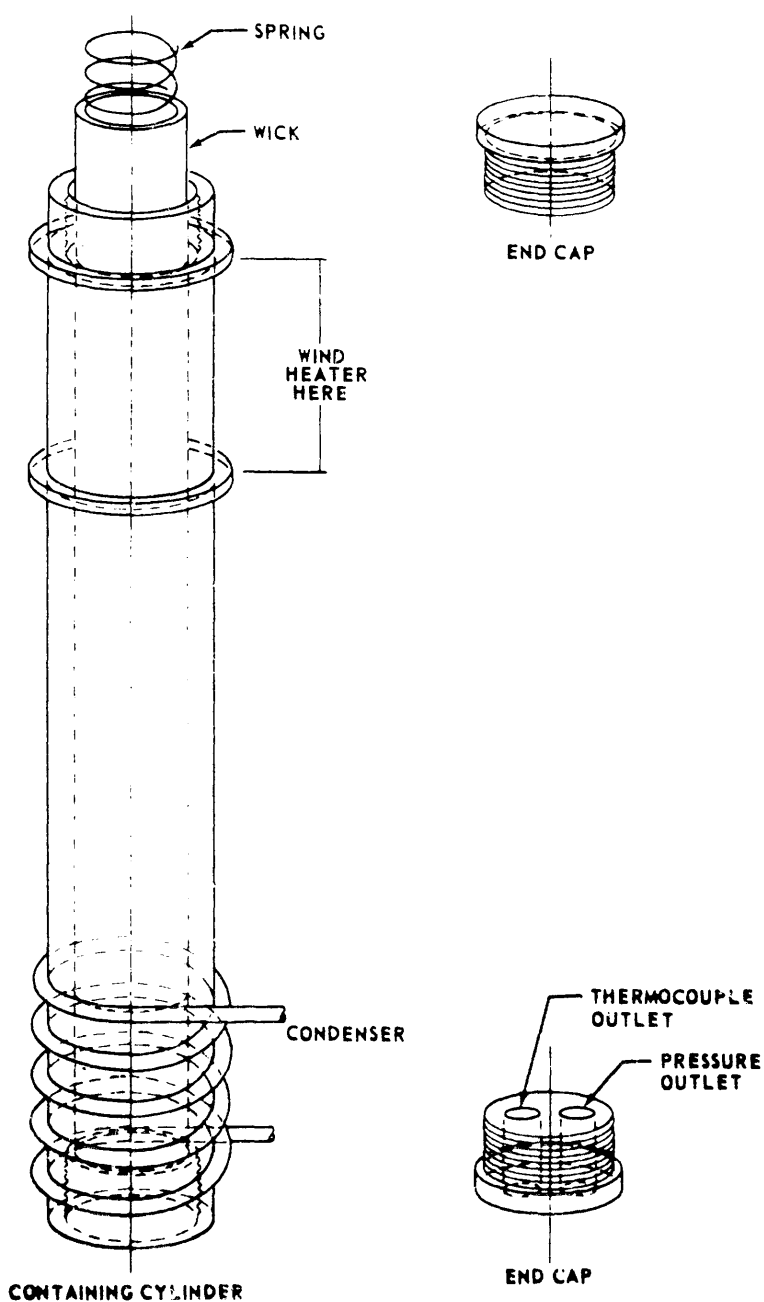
HEAT PIPE PARTS (ADIABATIC SECTION)
